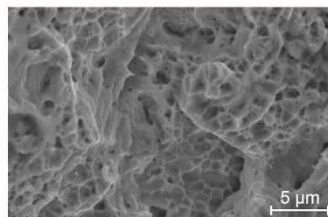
Fracture surface of the post-weld laser processed (PWP) sample.
